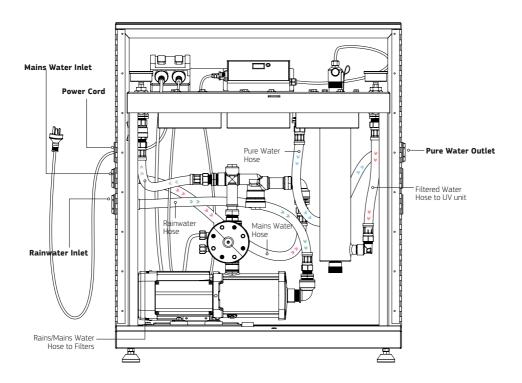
Alternative Outlet/Inlet Connections Example P9 & P12 Models
